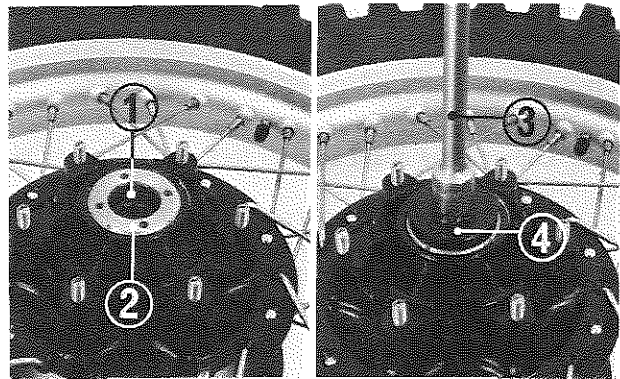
(1) Oil seal (3) 17 mm box wrench
